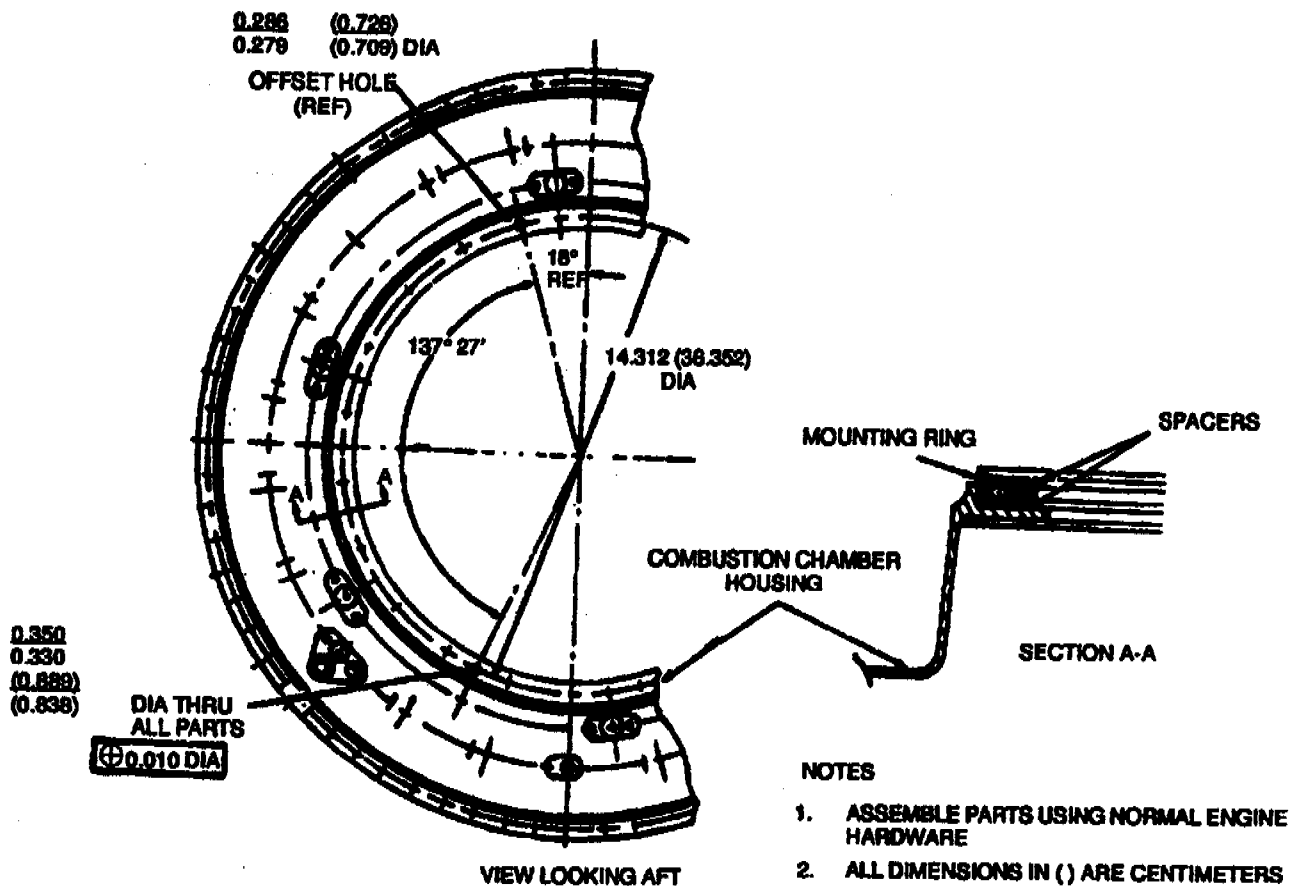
Rework of Combustion Chamber Housing, Mounting Ring, and Spacers.
